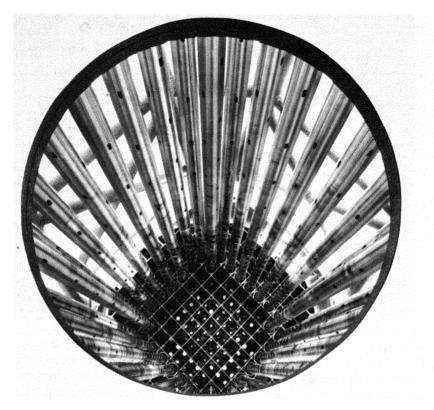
Top grid in place, showing alignment of control rod shrouds and seed fuel assemblies.
